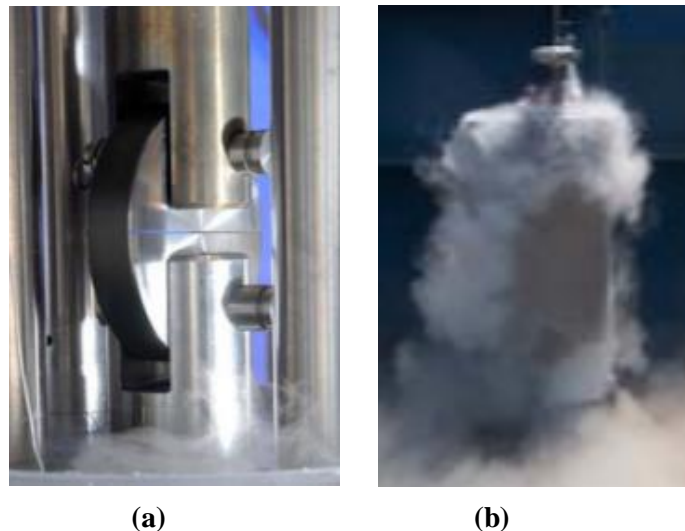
a) Composite ring mounted on a split disk fixture prior to LN₂ submersion and b) cryogenic COPV during cryo-testing [38].
